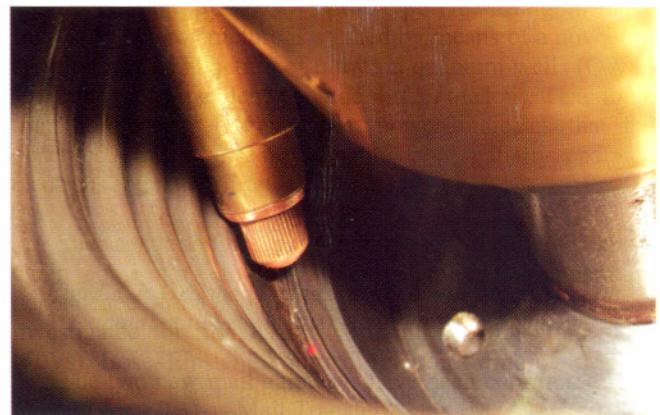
Manipulator developed for laser cutting and welding and it can be mounted on secondary shutdown system shut off tube.
